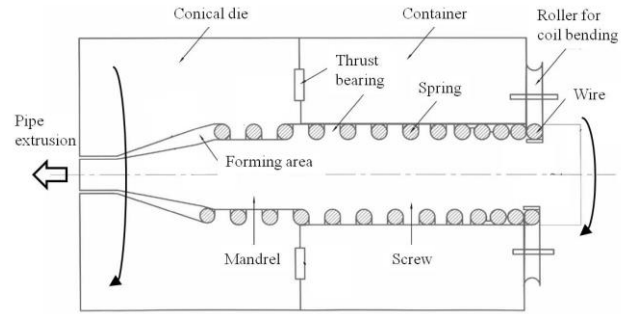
Welding concurrent extrusion forming process of pipe using wire spring material
